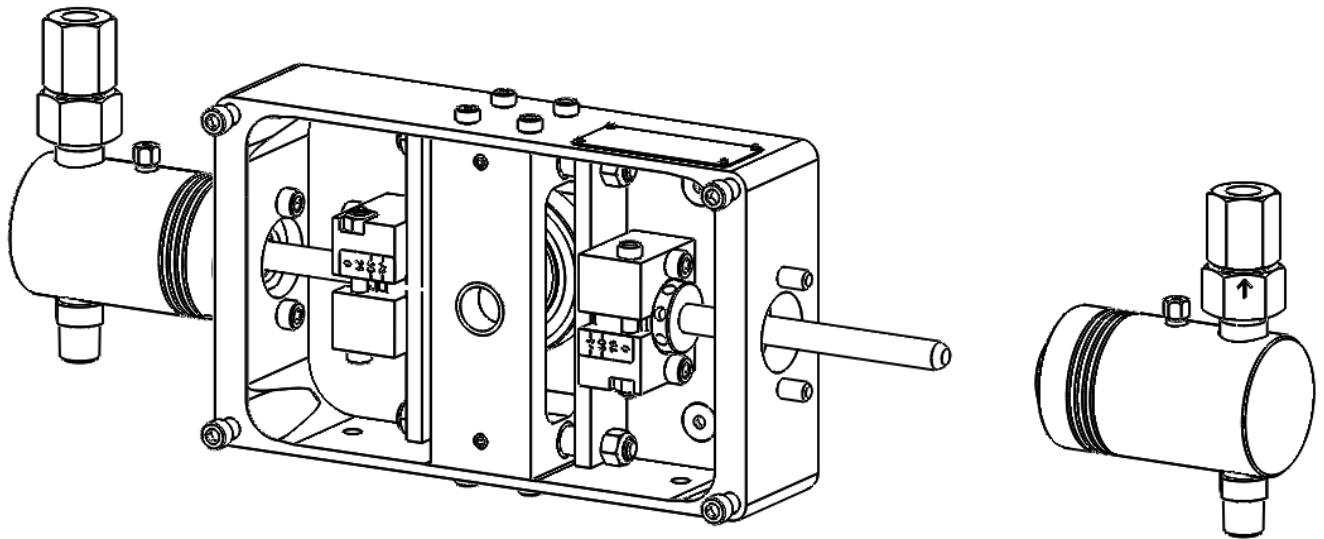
PLUNGER, SNAP RING, AND SCREW ASSEMBLY INSTALLATION
